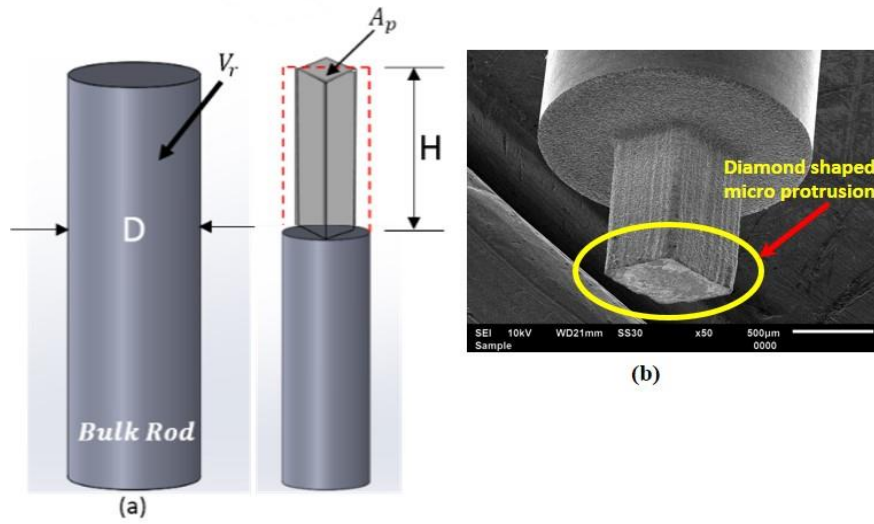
MRR* estimation (a) 3D solid model of workpiece electrode before machining, and (b) single diamond cross-section profile micro protrusion after machining.
